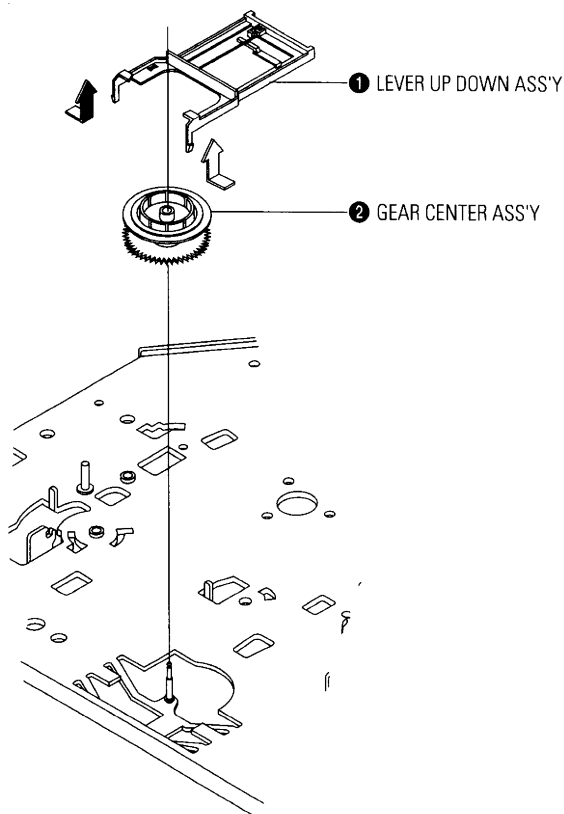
Lever Up Down Ass'y, Gear Center Ass'y Removal
